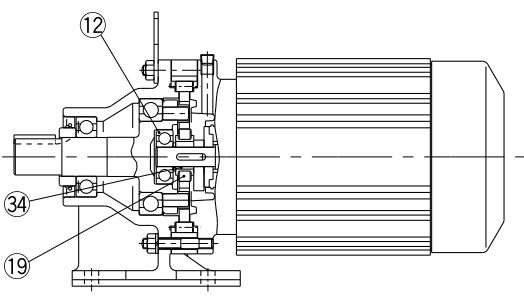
Type CNHM (Horizontal, Gearmotor)
